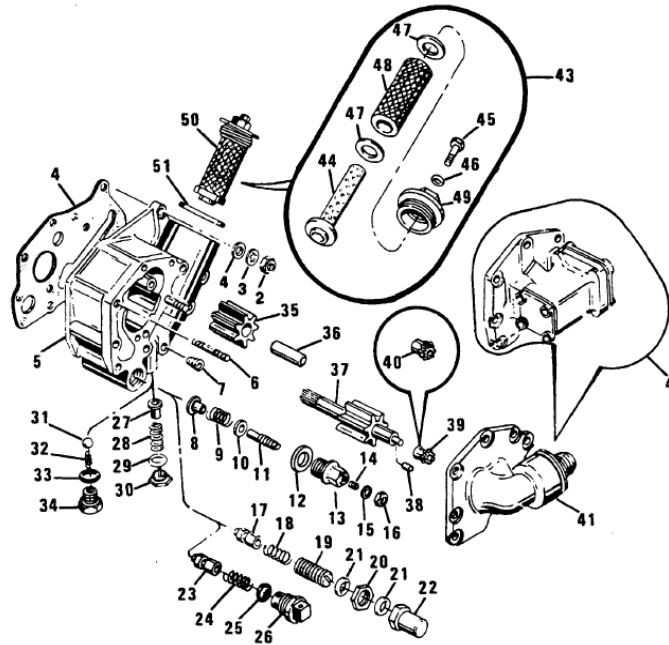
OIL PUMP ASSEMBLY
